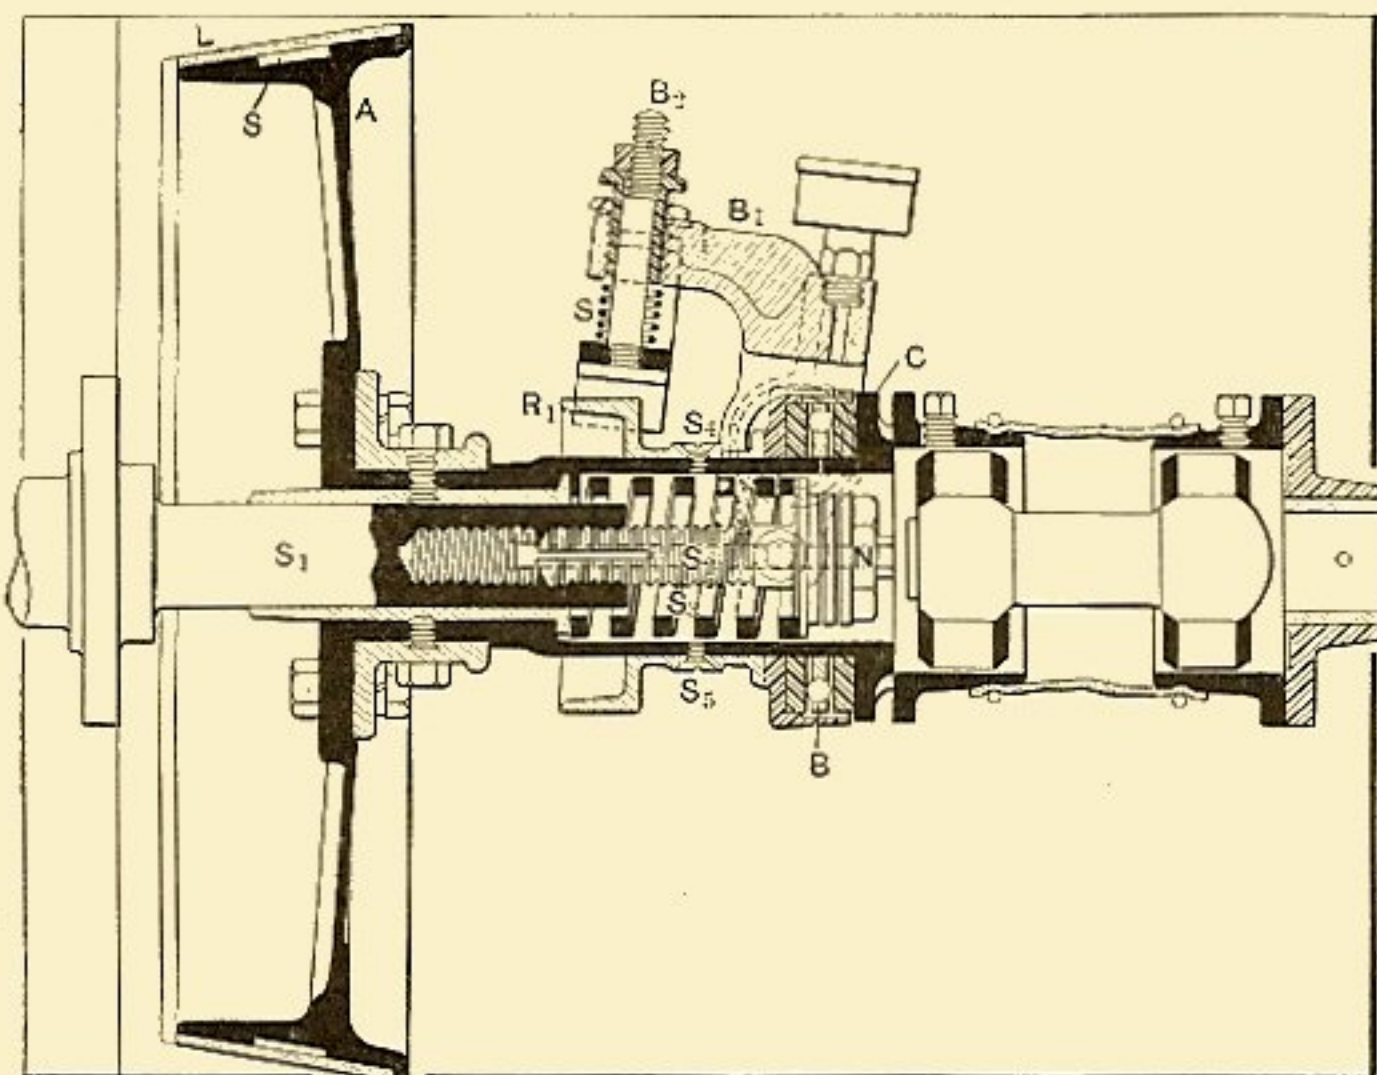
Detailed view of the National cone-type clutch and universal joint
